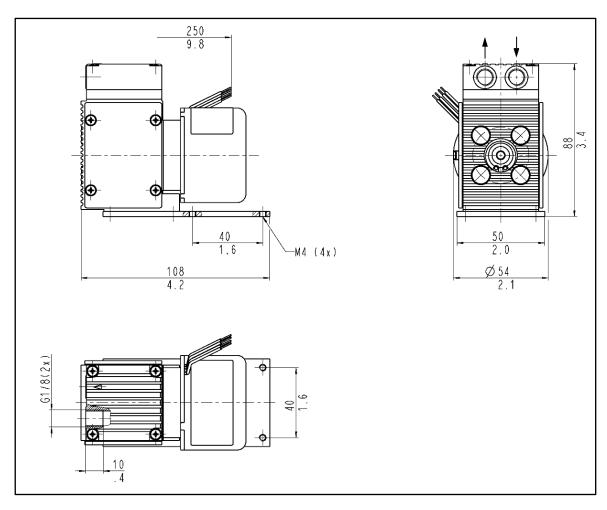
Mounting dimensions pump series N86K_.29DC-B (4 wires)
